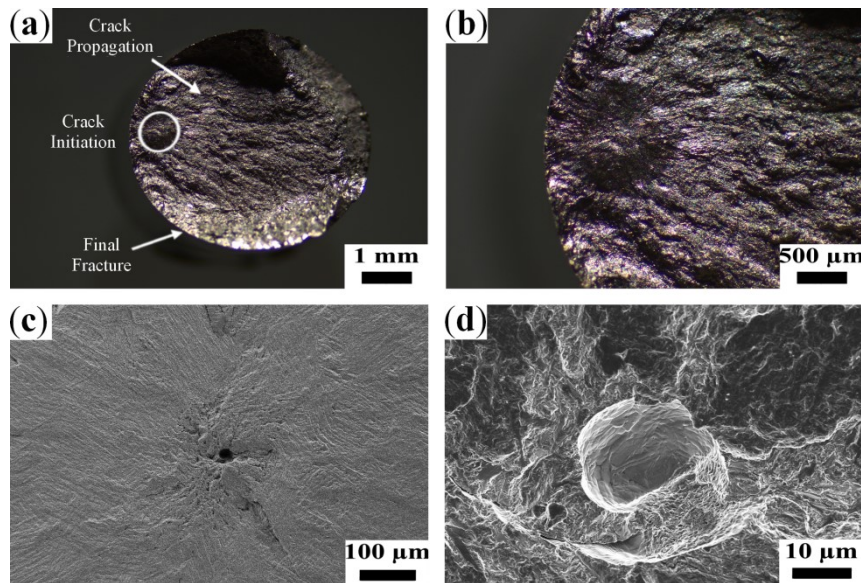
Fatigue fracture surfaces of the horizontal stress relieved and heat treated Ti-6Al-4V specimen tested at 550 MPa, observed by stereomicroscopy (a,b) and FESEM analysis (c,d): (a) overall fracture surface showing the crack initiation site, the crack propagation and final fracture areas; (b-d) crack initiation site observed at progressively higher magnification.
